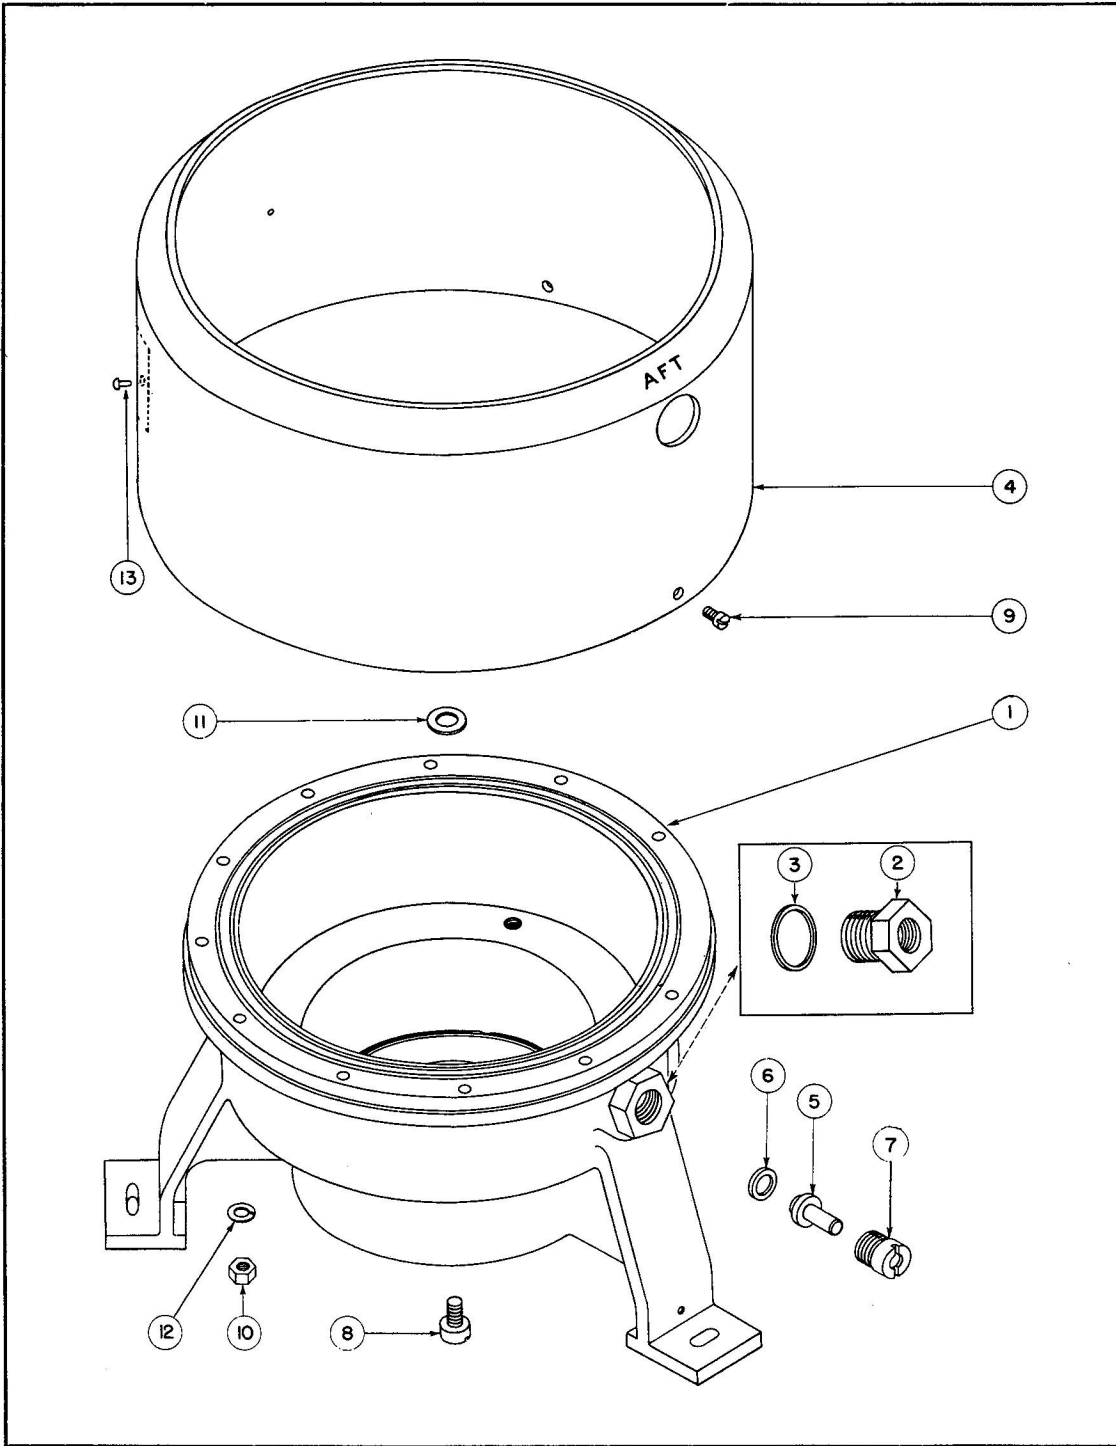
Exploded View - Compass - Compass Bowl and Attaching Parts
